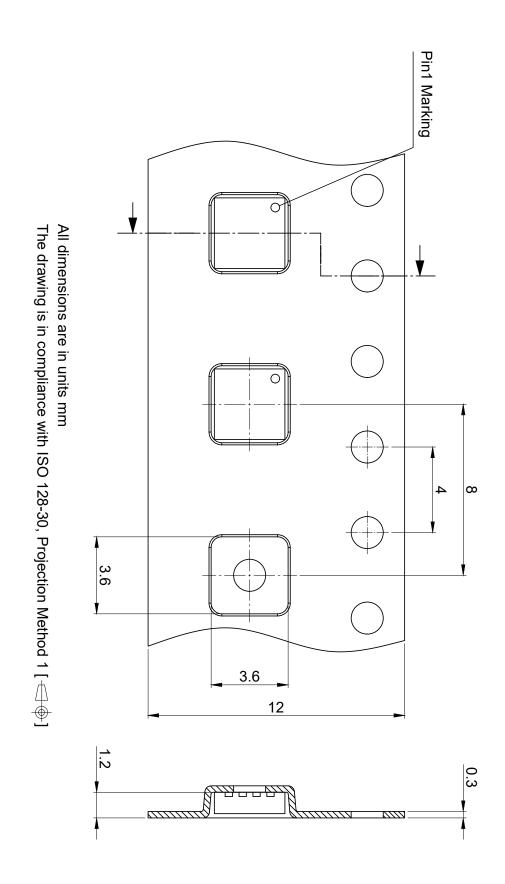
Outline Tape (PG-WHTFN-9-1), dimensions in mm
